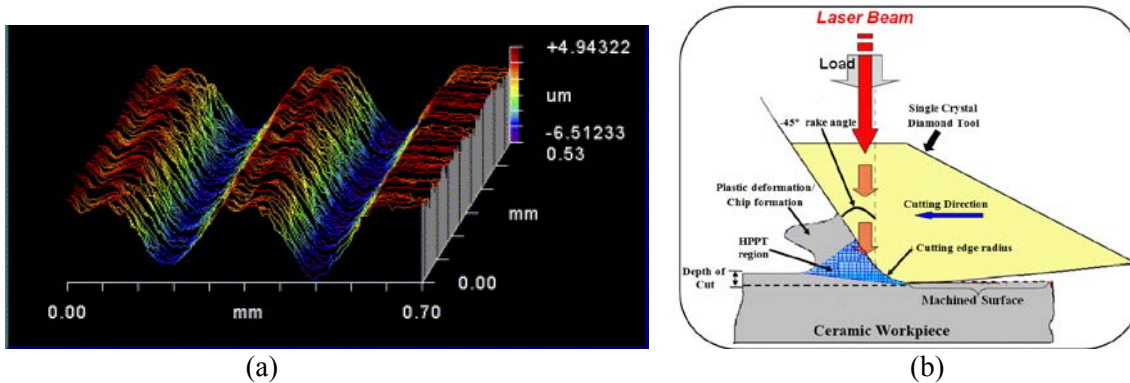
(a) Sinusoidal profile cut in H-13 steel (42 HRC) using a 1 W laser beam with a 70 μm spot size located 200 μm from the tool edge [56]; (b) Schematic of micro laser-assisted machining [57].
